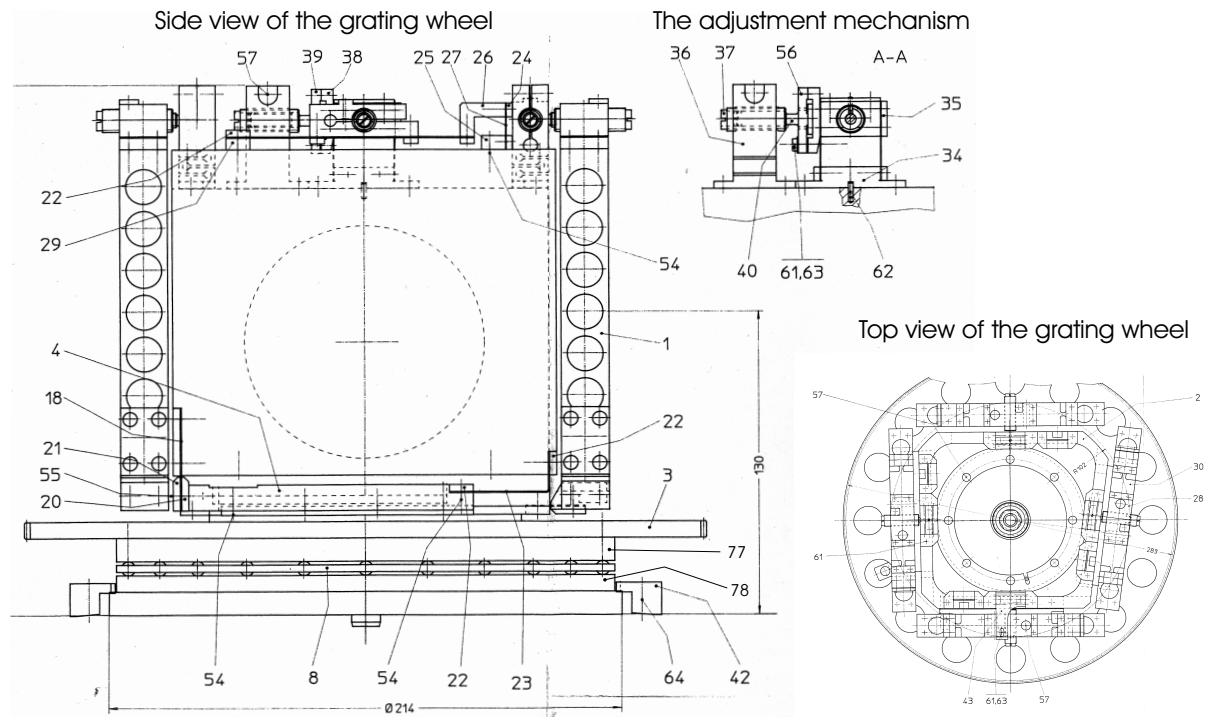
Extraction of the construction drawings for the grating wheel. The side view shows two of the gratings (1) with the lightweighting holes on the mount, with the mount screwed onto the grating wheel (3). This is directly connected to the moving part of the position encoder (77), which in reference to the fixed bottom part (78) allows to determine the angular position of the grating wheel with a resolution of $\sim 2''$. The gratings are connected to the central part of the mount via steel plate springs and adjustment mechanisms. The springs (e.g. 18, 23, 43) allow relative movements of grating and mount during cooldown. The purpose of the adjustment mechanisms (see blow-up in top right corner and various views on top of the gratings and mount) is to position the grating very accurately with respect to the optical axis. These adjustments can only be made when the instrument is open. However, the displacement of the spectrum needs to be measured when the instrument is cold, in thermal equilibrium and operation mode. Movements around the axis parallel to the grooves are performed by rotating the whole grating wheel. Displacements concerning the axis orthogonal to the grating surface, which lead to a tilt in the spectra (not parallel to columns of array any more) are corrected by turning the differential screw on the top right corner of each grating. Displacements of the object points, caused by a wrong grating angle around the axis perpendicular to the grooves, are corrected by the adjustment mechanism connected to the top centre of each grating. Each of these displacements need to be determined by scanning a point source through the field of view and by acquiring a calibration spectrum for each grating on the wheel. These linear or angular displacements need to be converted into turns of the differential screws, which are then turned by the required amount after the instrument is warmed up again.
